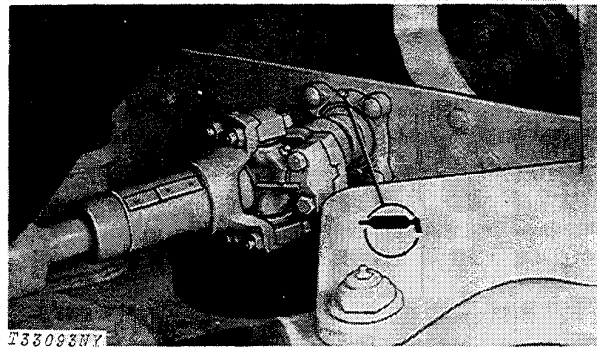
Front Drive Shaft Support Bearing (1 Point)
